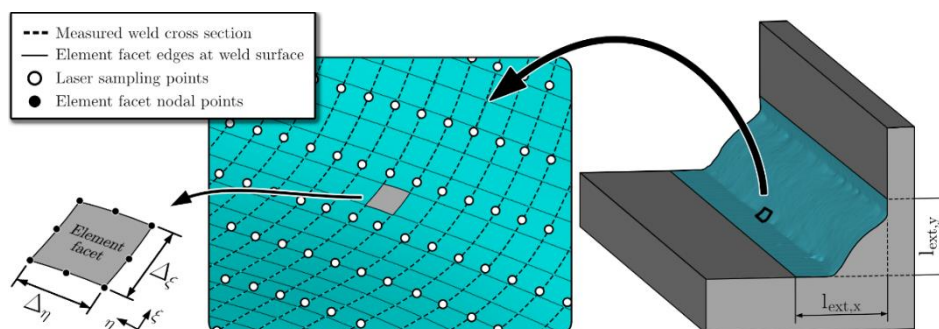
Digitally recreated weld specimen with true weld geometry directly modelled.
